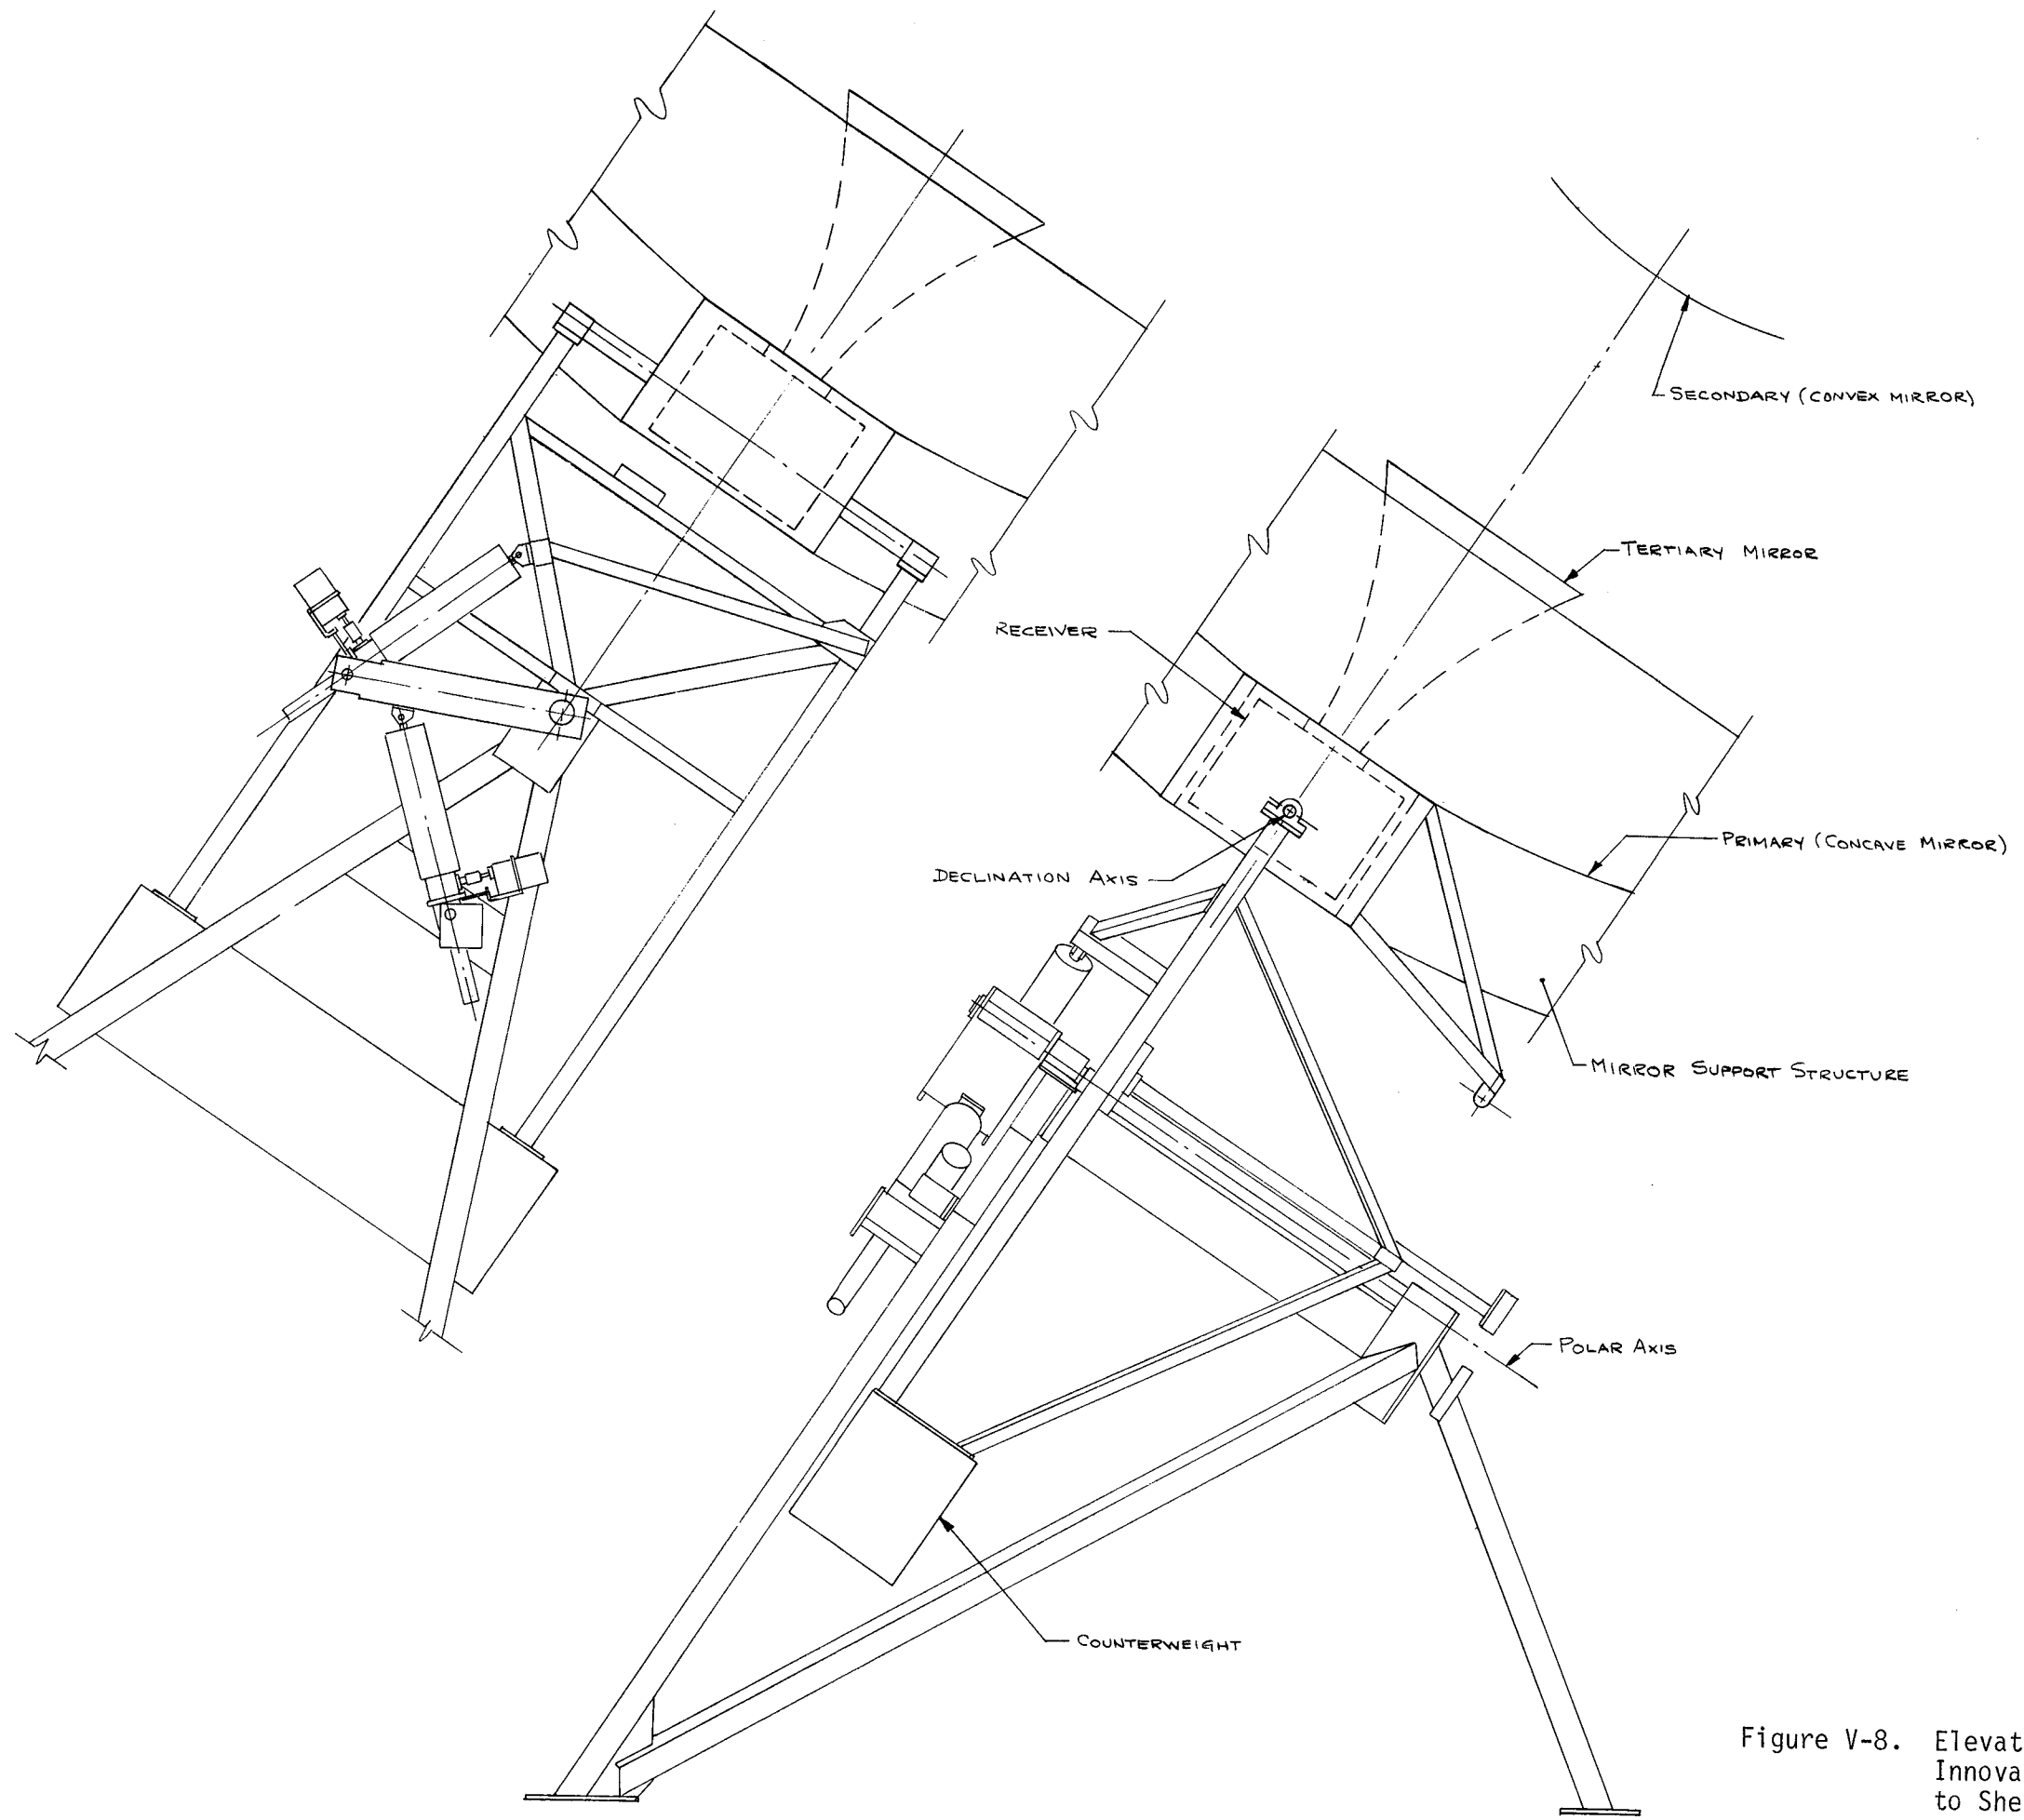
Elevation Mounting Detail - Innovative Solar Thermal Receiver to Shenandoah Support
